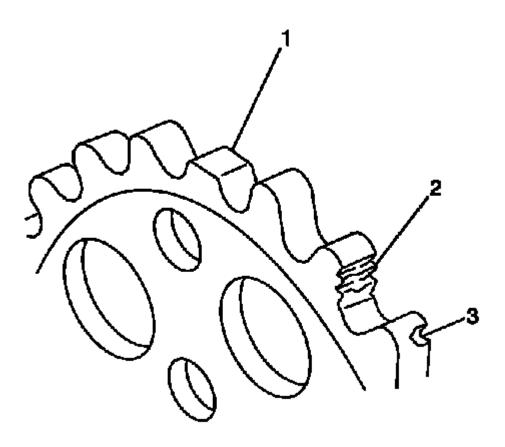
Identifying Damaged Sprocket Teeth Courtesy of GENERAL MOTORS CORP.
